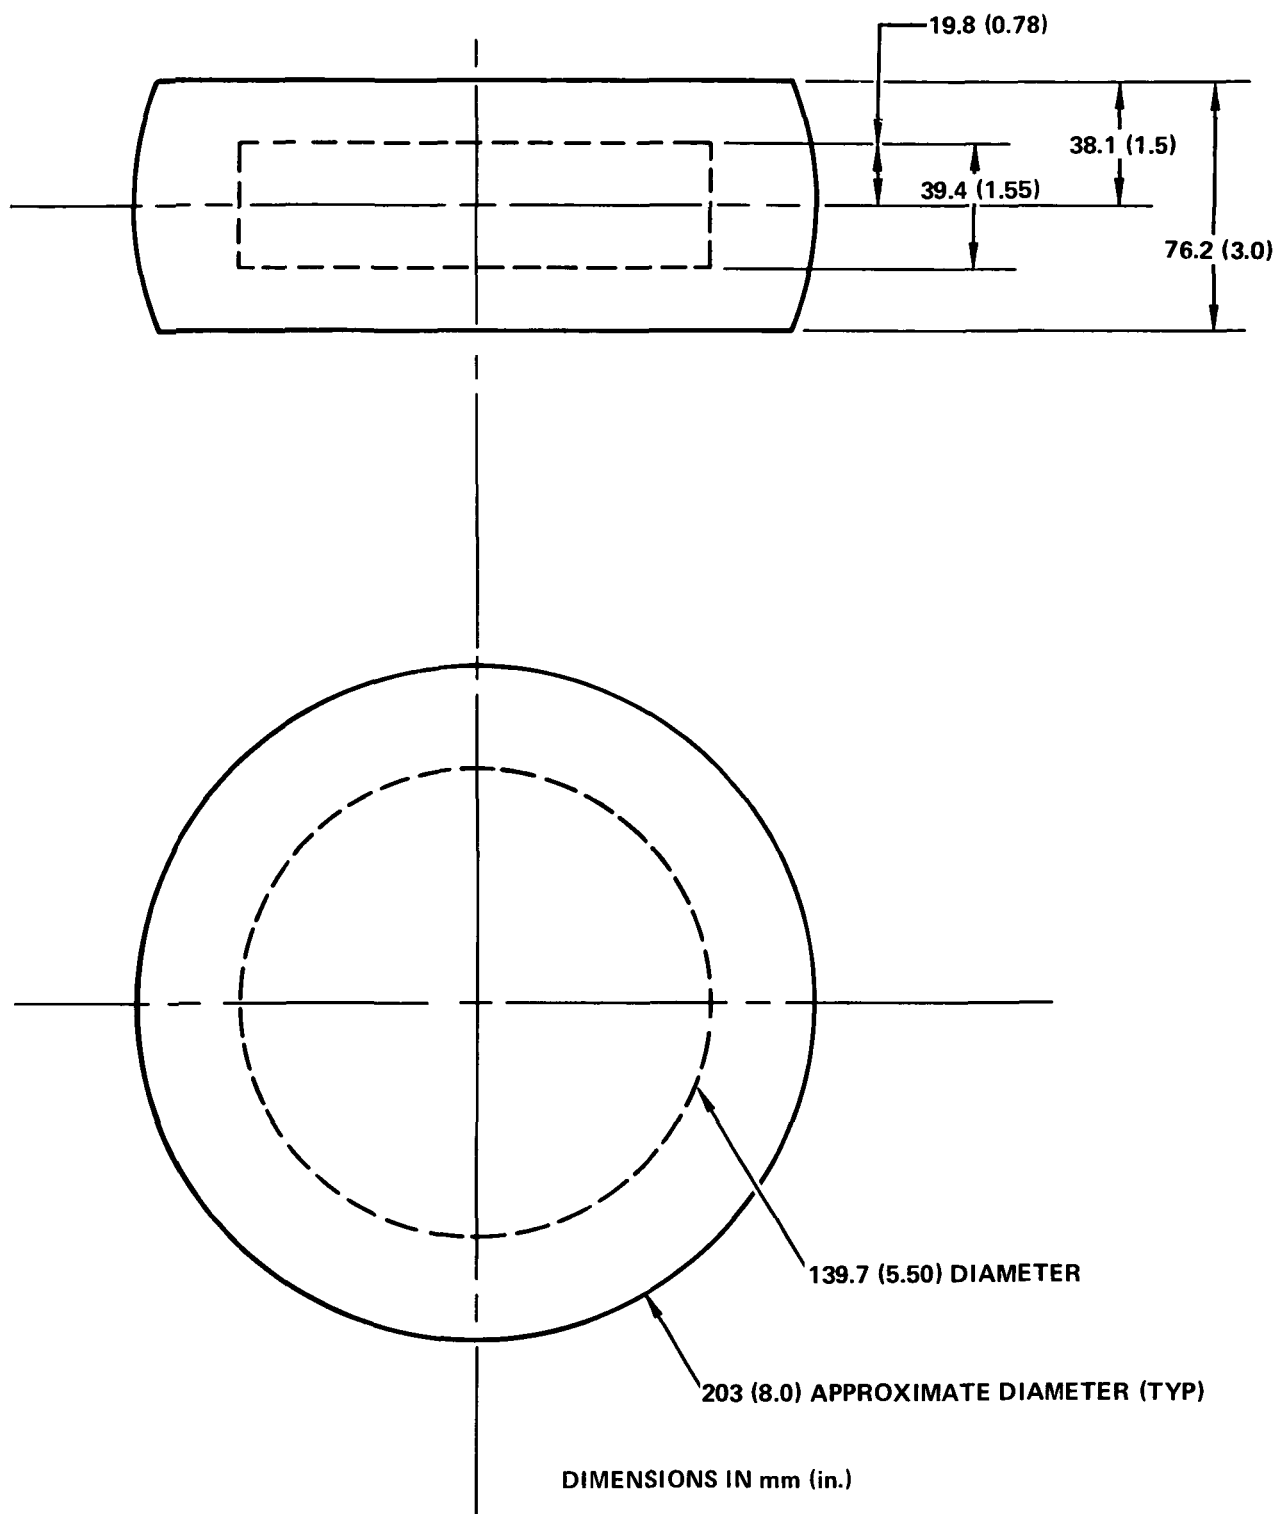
Layout Drawing for Rotating Disk Specimens,
